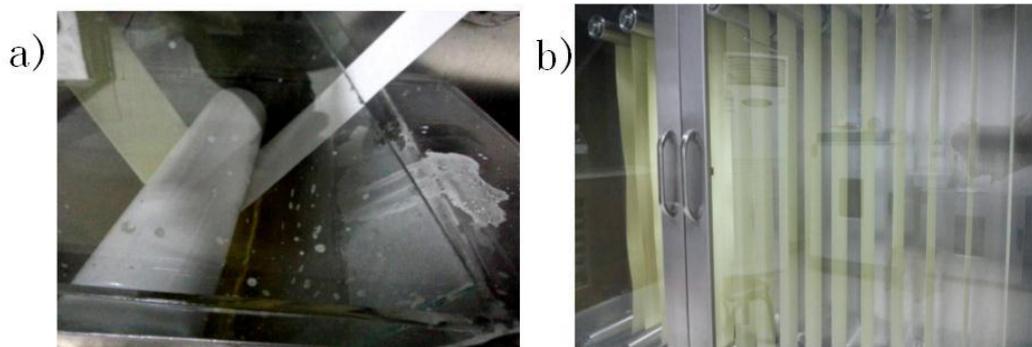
Machinery strips making. a). impregnation; b) dry the strip.
